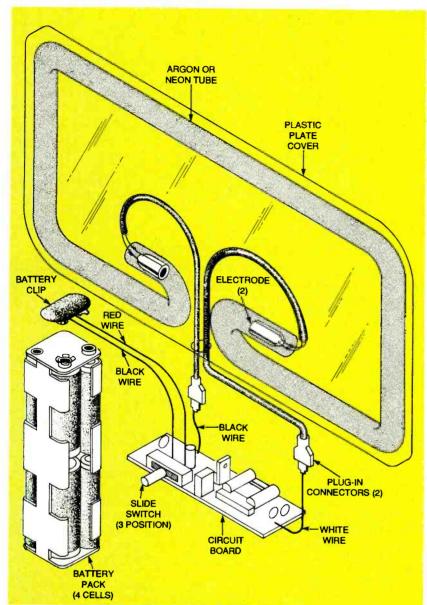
NEON OR ARGON GAS TUBE LICENSE PLATE frame system showing driver circuit connections to the gas tube/ cover assembly.
